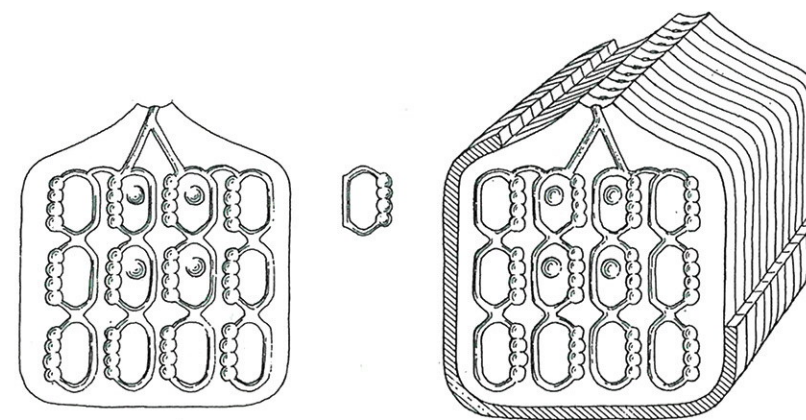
London. Clay mould for 144 buckle frames from a copper-alloy foundry; GYE92 site with some of the 13th/14th centuries' foundry's repertoire of cast accessories (Drawing: N. Harriss and F. Vardy).
